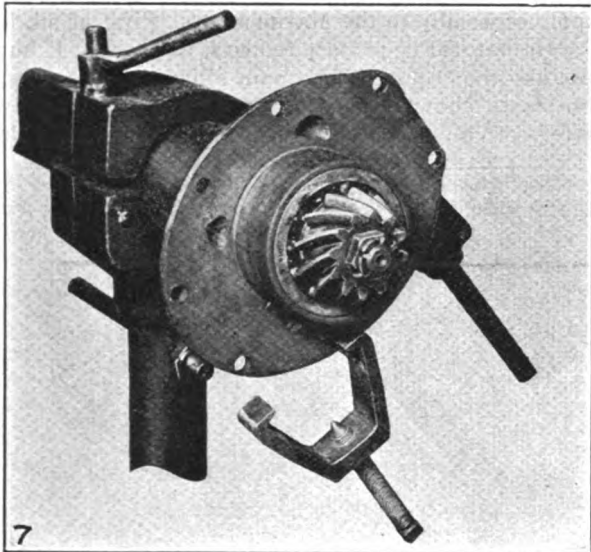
READY TO PULL THE DRIVING PINION. FIG. 8—DIFFERENTIAL UNIT WITH AXLE HOUSINGS REMOVED. FIG. 9—PULLING THE REAR-AXLE BALL BEARINGS. FIG. 10—REAR AXLE PARTLY DISASSEMBLED. FIG. 11—SHOWING CONVENIENCE OF WORK STAND. FIG. 12—AXLE HOUSING REMOVED SHOWING INNER BEARING
